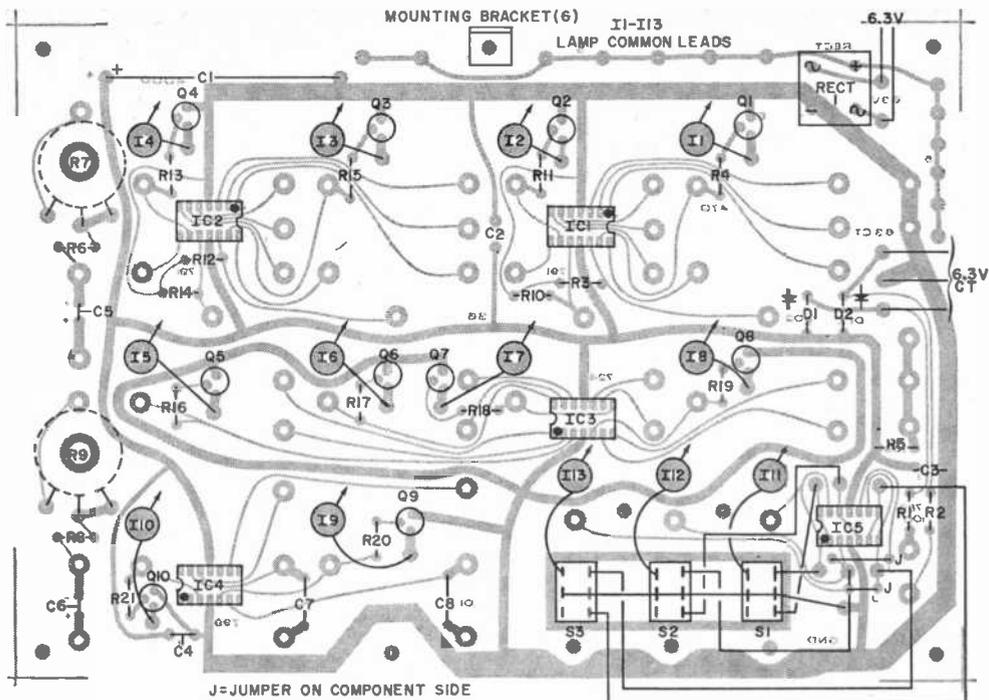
Be extremely careful when mounting components on circuit board to observe proper lead orientations. Terminal ends of S1-S3 pass through slot in board (lower right) and terminals connect to appropriate points in circuit via wire.
